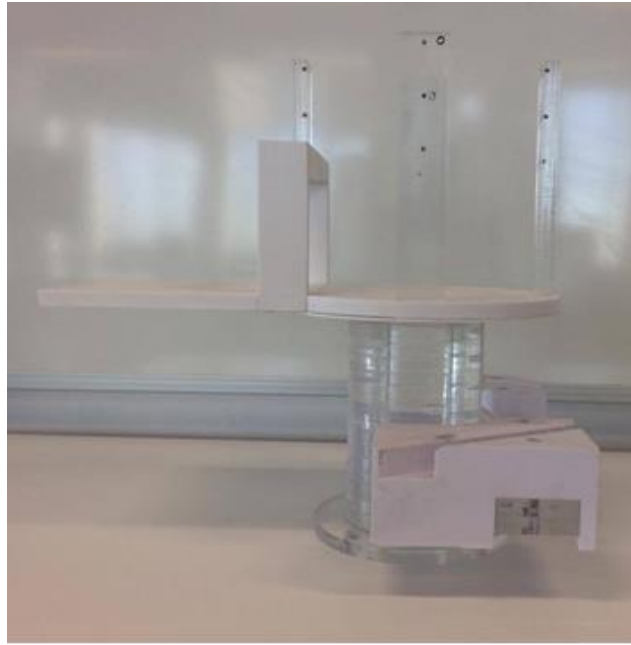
Final Manufactured Base Plate Calibration Cage: Side View
